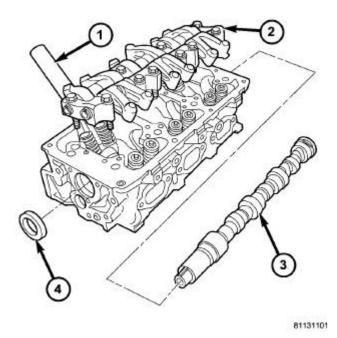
CYLINDER HEAD, CAMSHAFT AND ROCKER ARM Courtesy of CHRYSLER LLC
